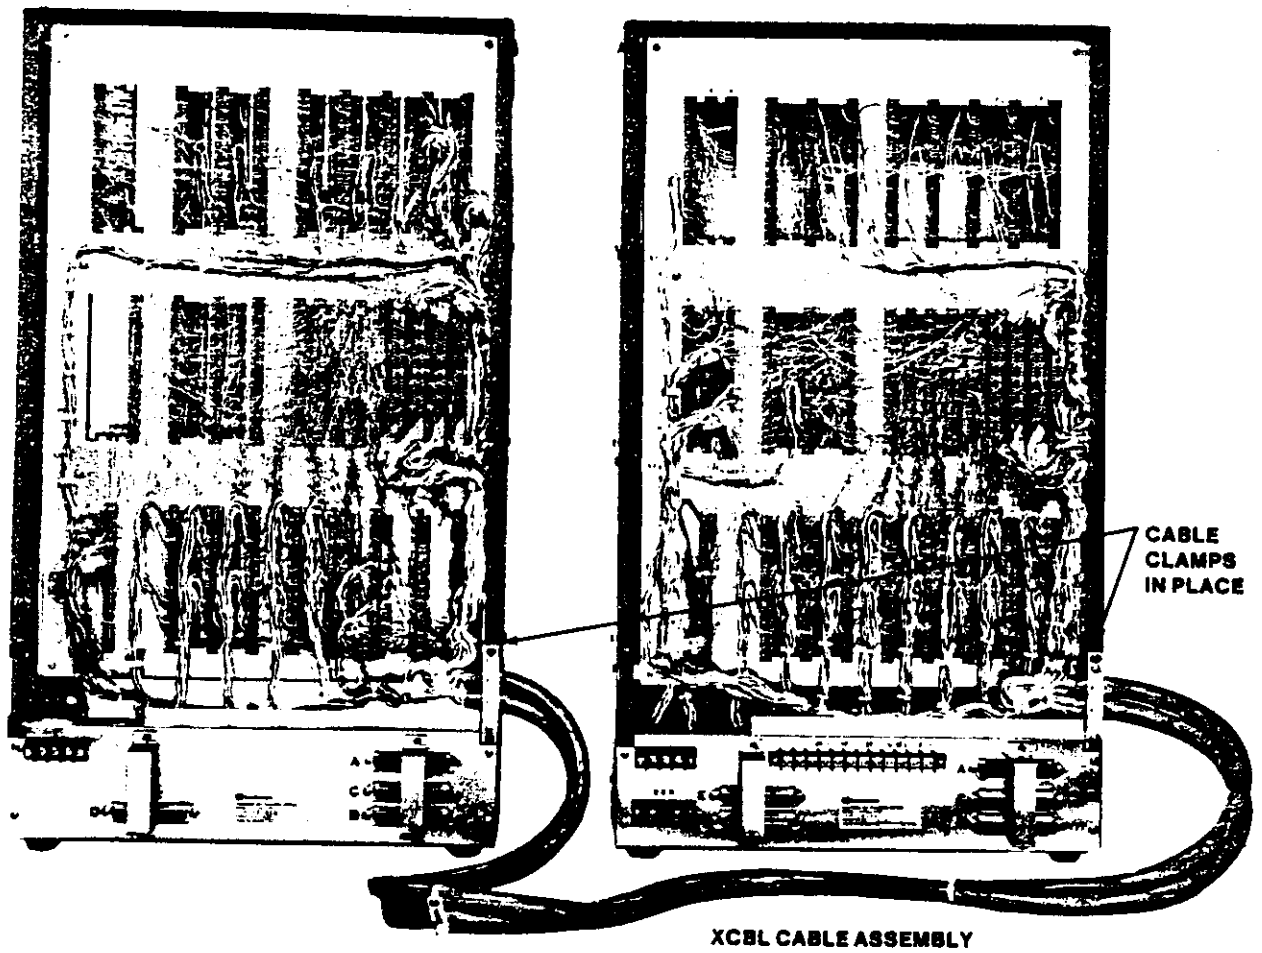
XCBL CABLE ASSEMBLY PLACEMENT
